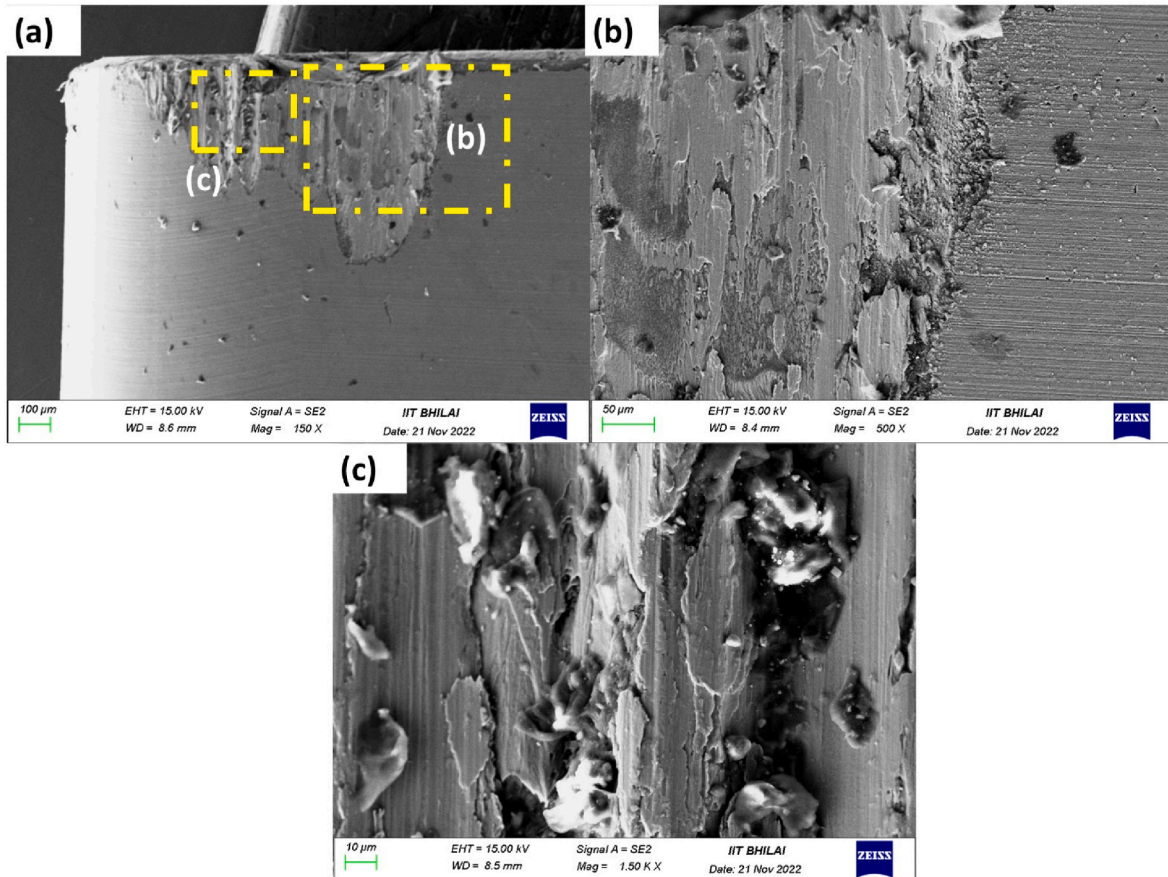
SEM micrographs of the flank surface of TiSiN coated cutting tool after machining at 75 m/min cutting speed.
